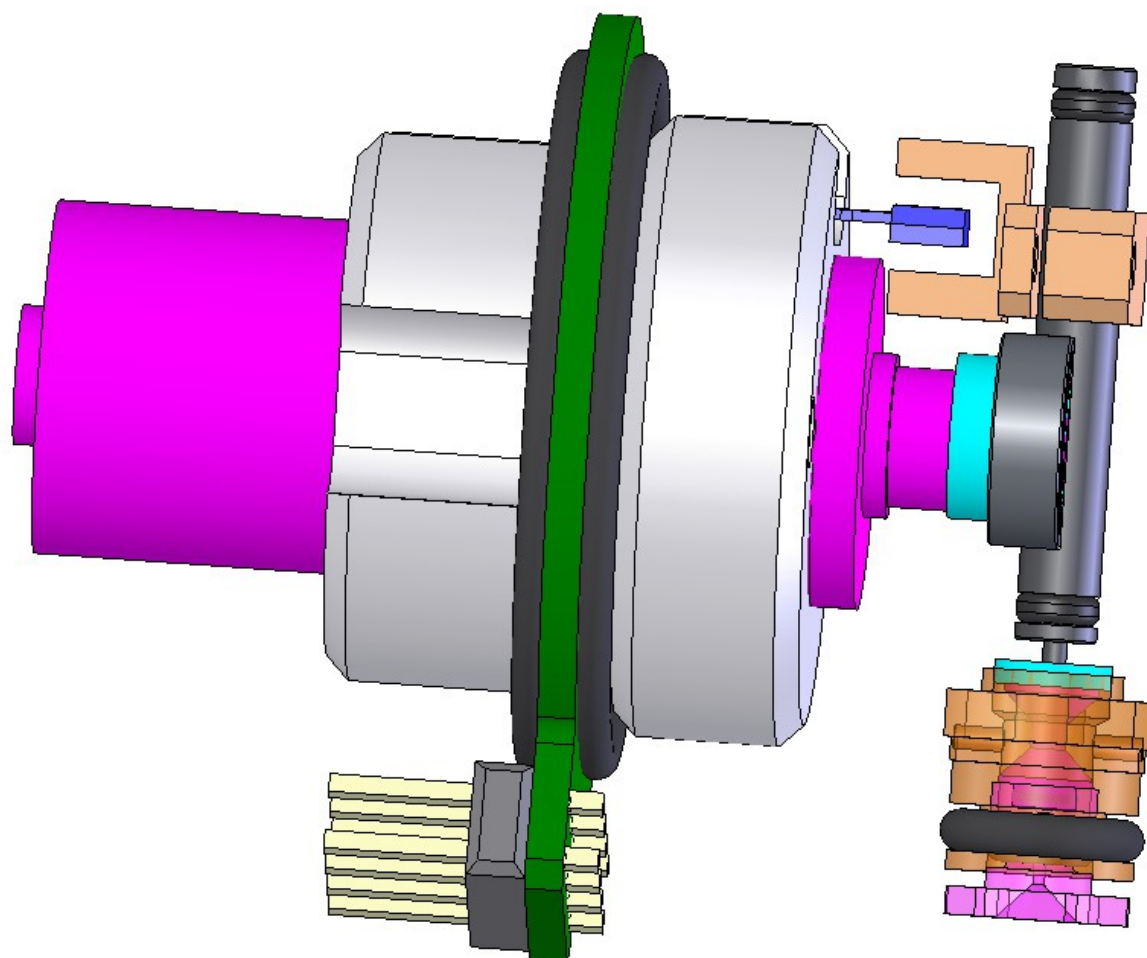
Injector with case removed, showing Hall sensor position (top), drive piston and circuit board holding the sensor and connecting to motor. Circuit board acts as a feed-through, to prevent off-gas components reaching the breathing loop.
